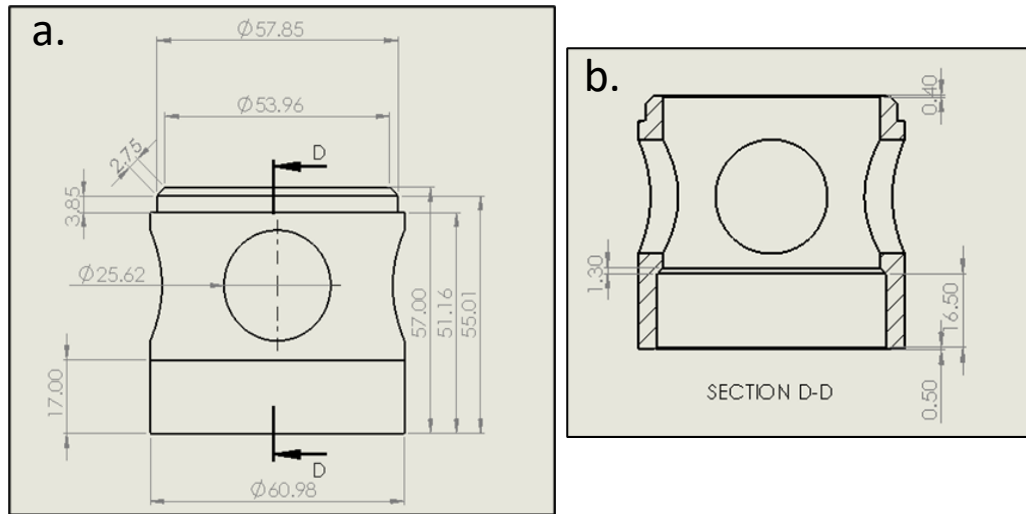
Cylindrical part drawing and section view of cylindrical part (a., b.)
